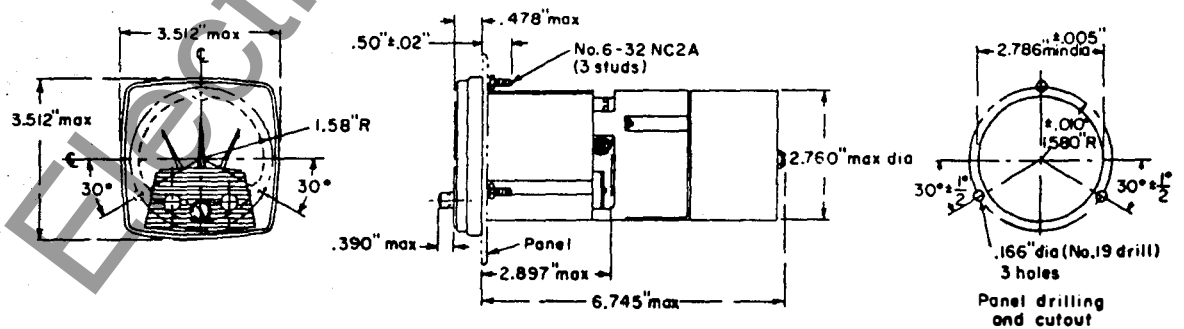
Outline and panel cut-out dimensions for Type 195 meter relay, 3 1/2-inch size, with control unit piggy-back mounted.
